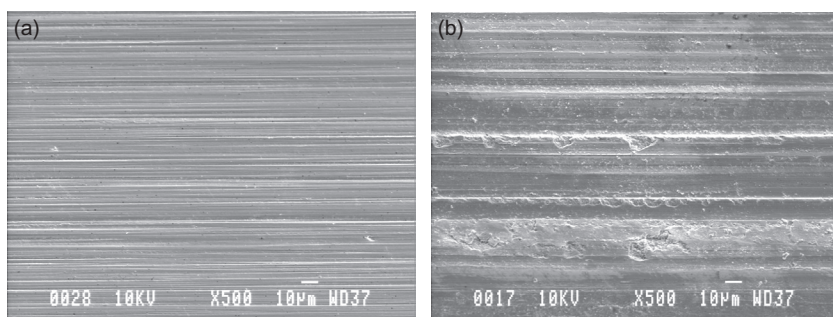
Surface ground with a 25 μm (a), and a 180 μm (b) grinding wheel. The coarser grinding shows fractures, in addition to the grinding scratches.
